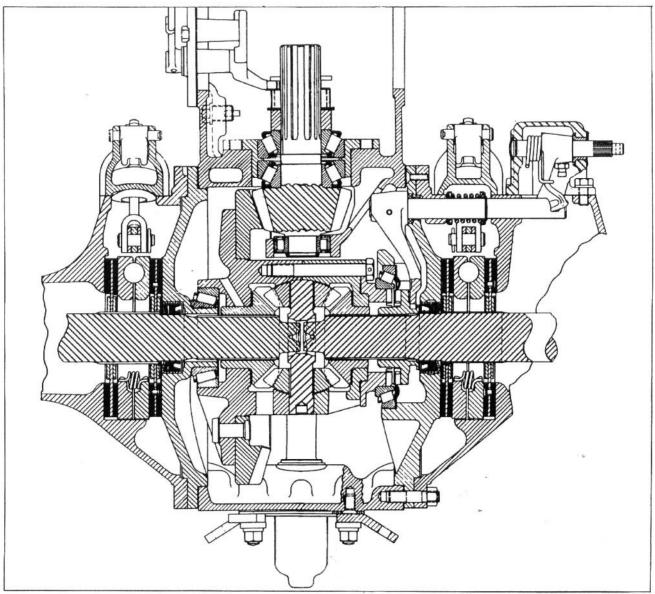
DRIVE AXLE ASSEMBLY — PARTIAL CROSS SECTION (W/DIFF, LOCK)
